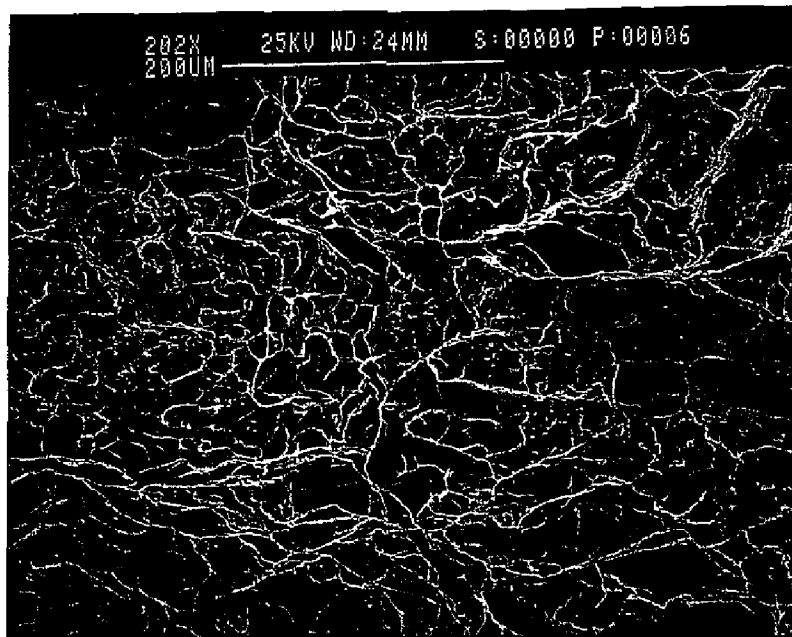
Fractograph from location #6 shows failure due to dimpled (overload) fracture; X202.
